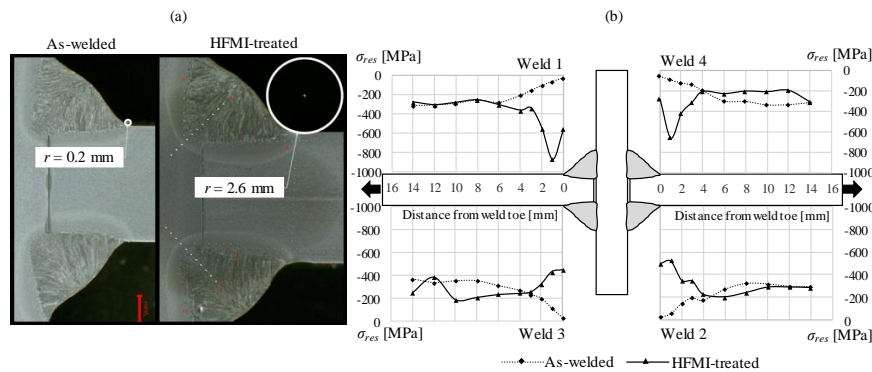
(a) Weld toe geometry; (b) surface residual stress distribution along specimen surface in as-welded and HFMI-treated conditions.
